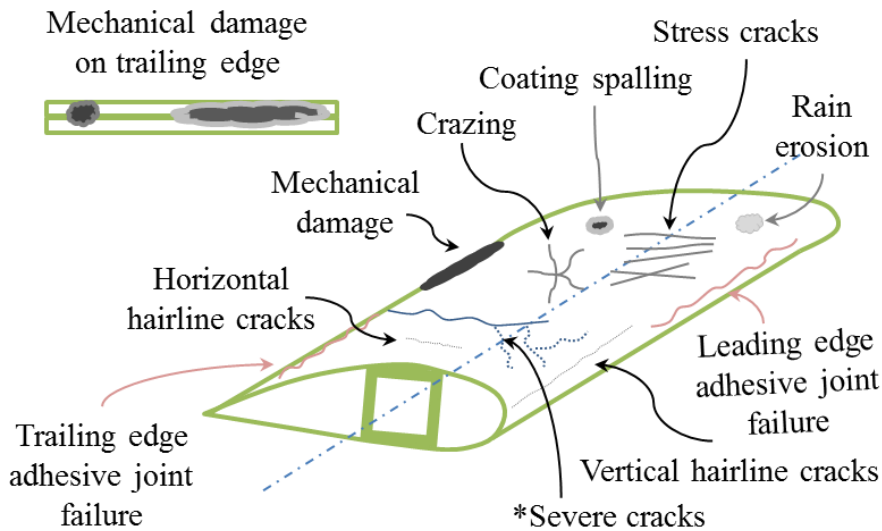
Types of surface defects. Adhesive joint failure and delamination are structural failures under the surface. Severe cracks appear as horizontal cracks starting from the trailing edge that can be delamination or fiber splitting ($\pm 45^\circ$) under the coating layers [6].
